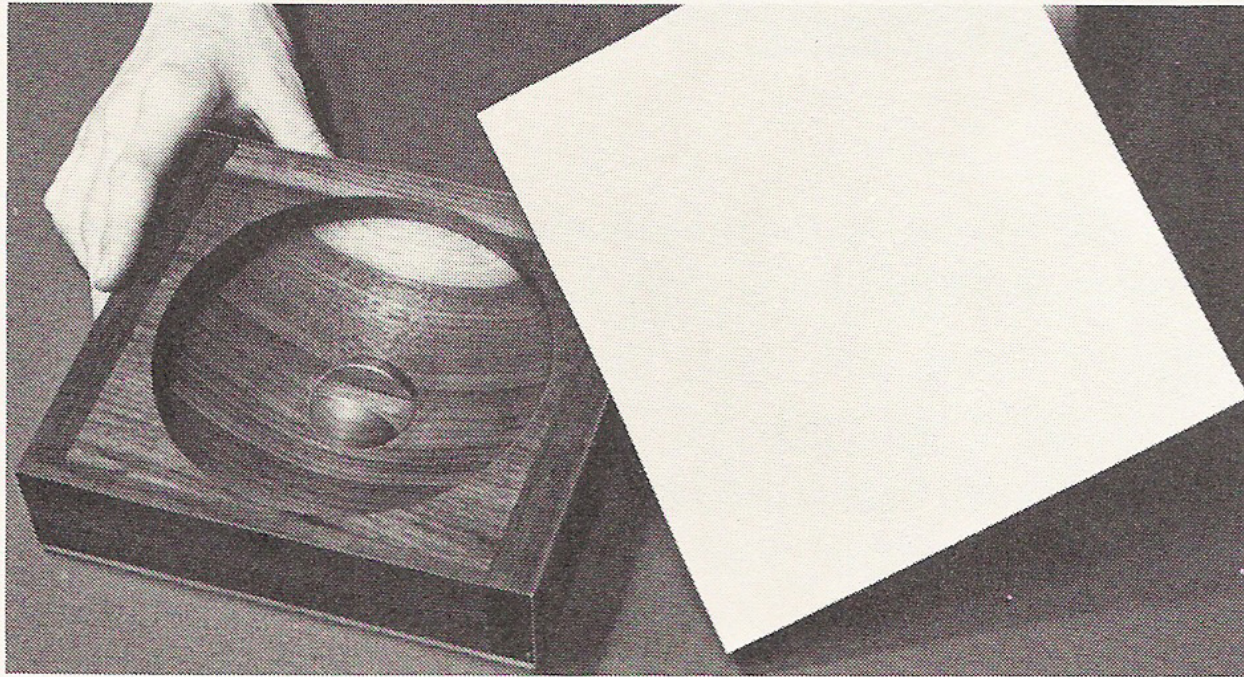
Completed wood mold for the container lid with plastic sheet cut to size ready for forming.
